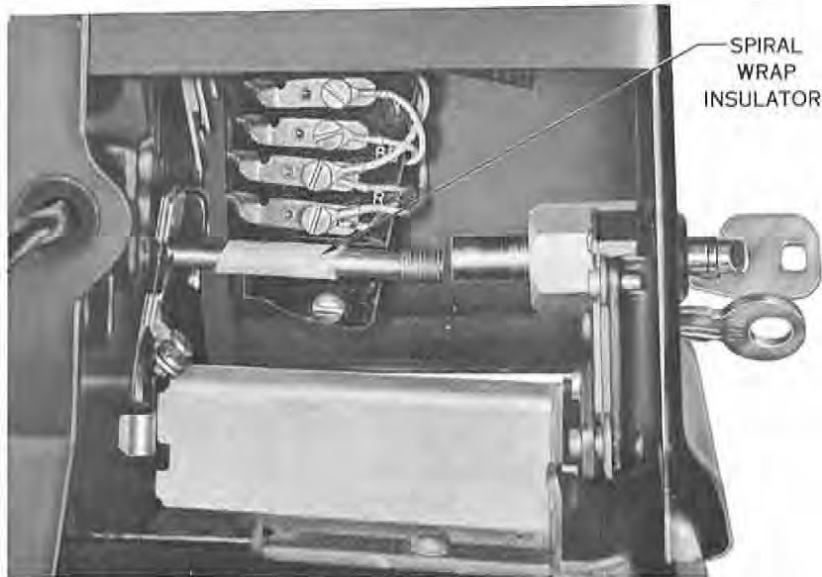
Cutaway Section, Mating of Bolt Fastener and KS-19277 Lock
